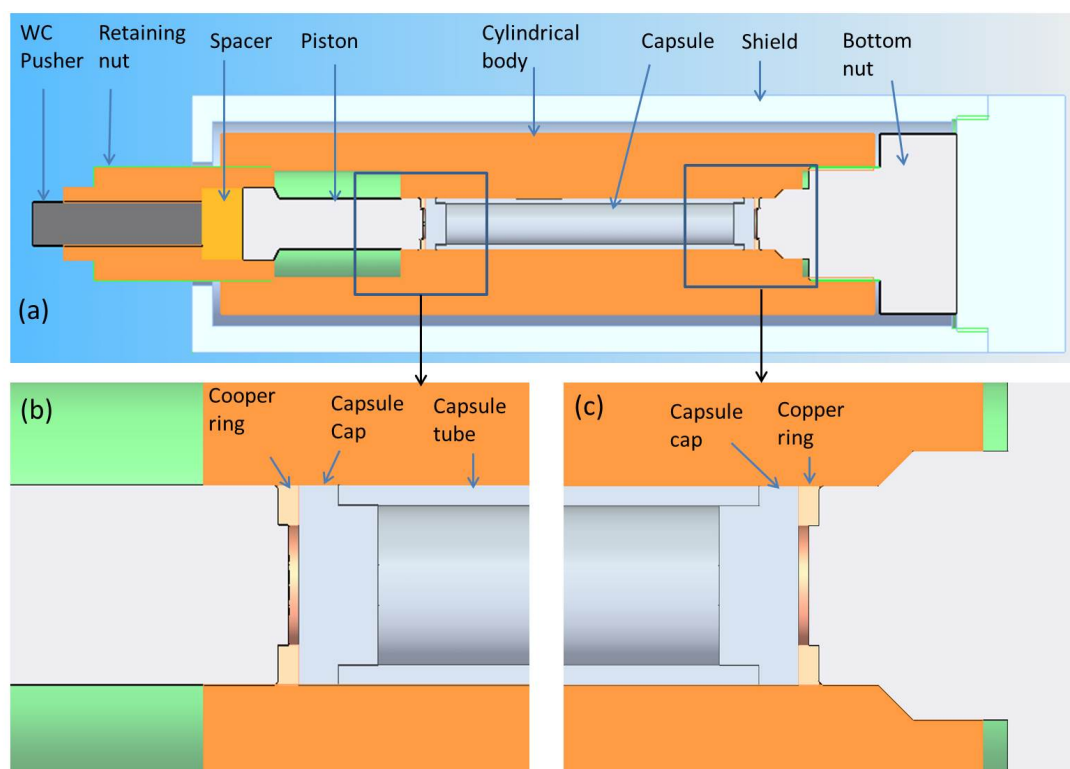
Type B liquid cell, (a) the section view of the assembly; b enlarge view on the top seals; (c) enlarge view of the bottom seal.
